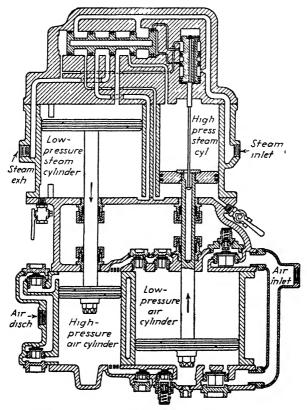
Cross section of compound steam-driven two-stage compressor. (Courtesy of Westinghouse Air Brake Co.)
